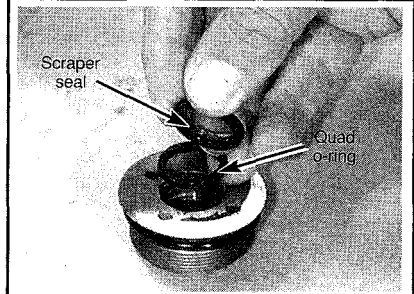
Lubricate and install a new trim cylinder scraper seal and quad ring
